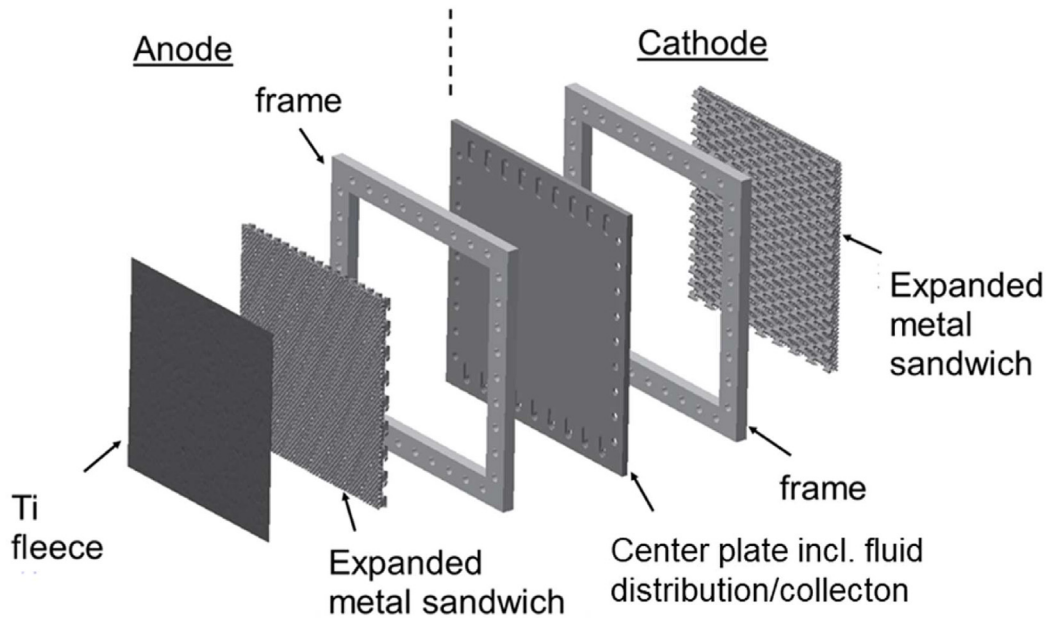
Exploded view of the novel bipolar plate unit. All shown elements will be combined to one piece by diffusion welding.
